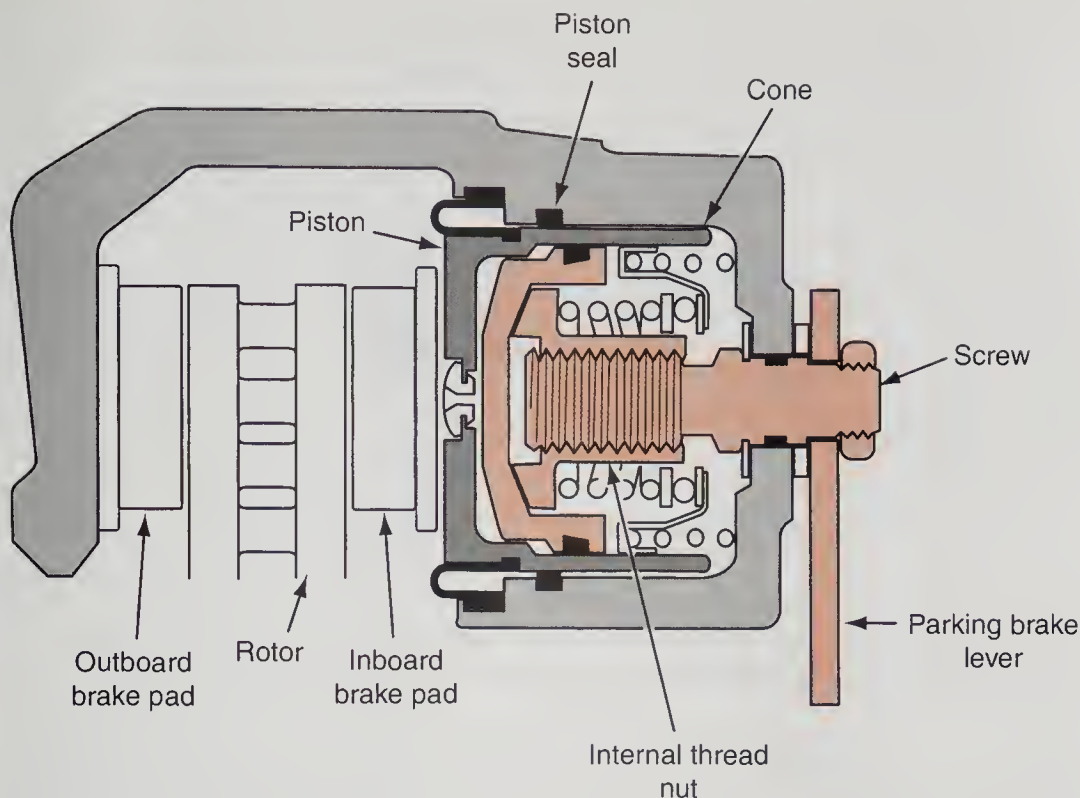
A GM screw-and-nut parking brake mechanism for rear disc brakes.
